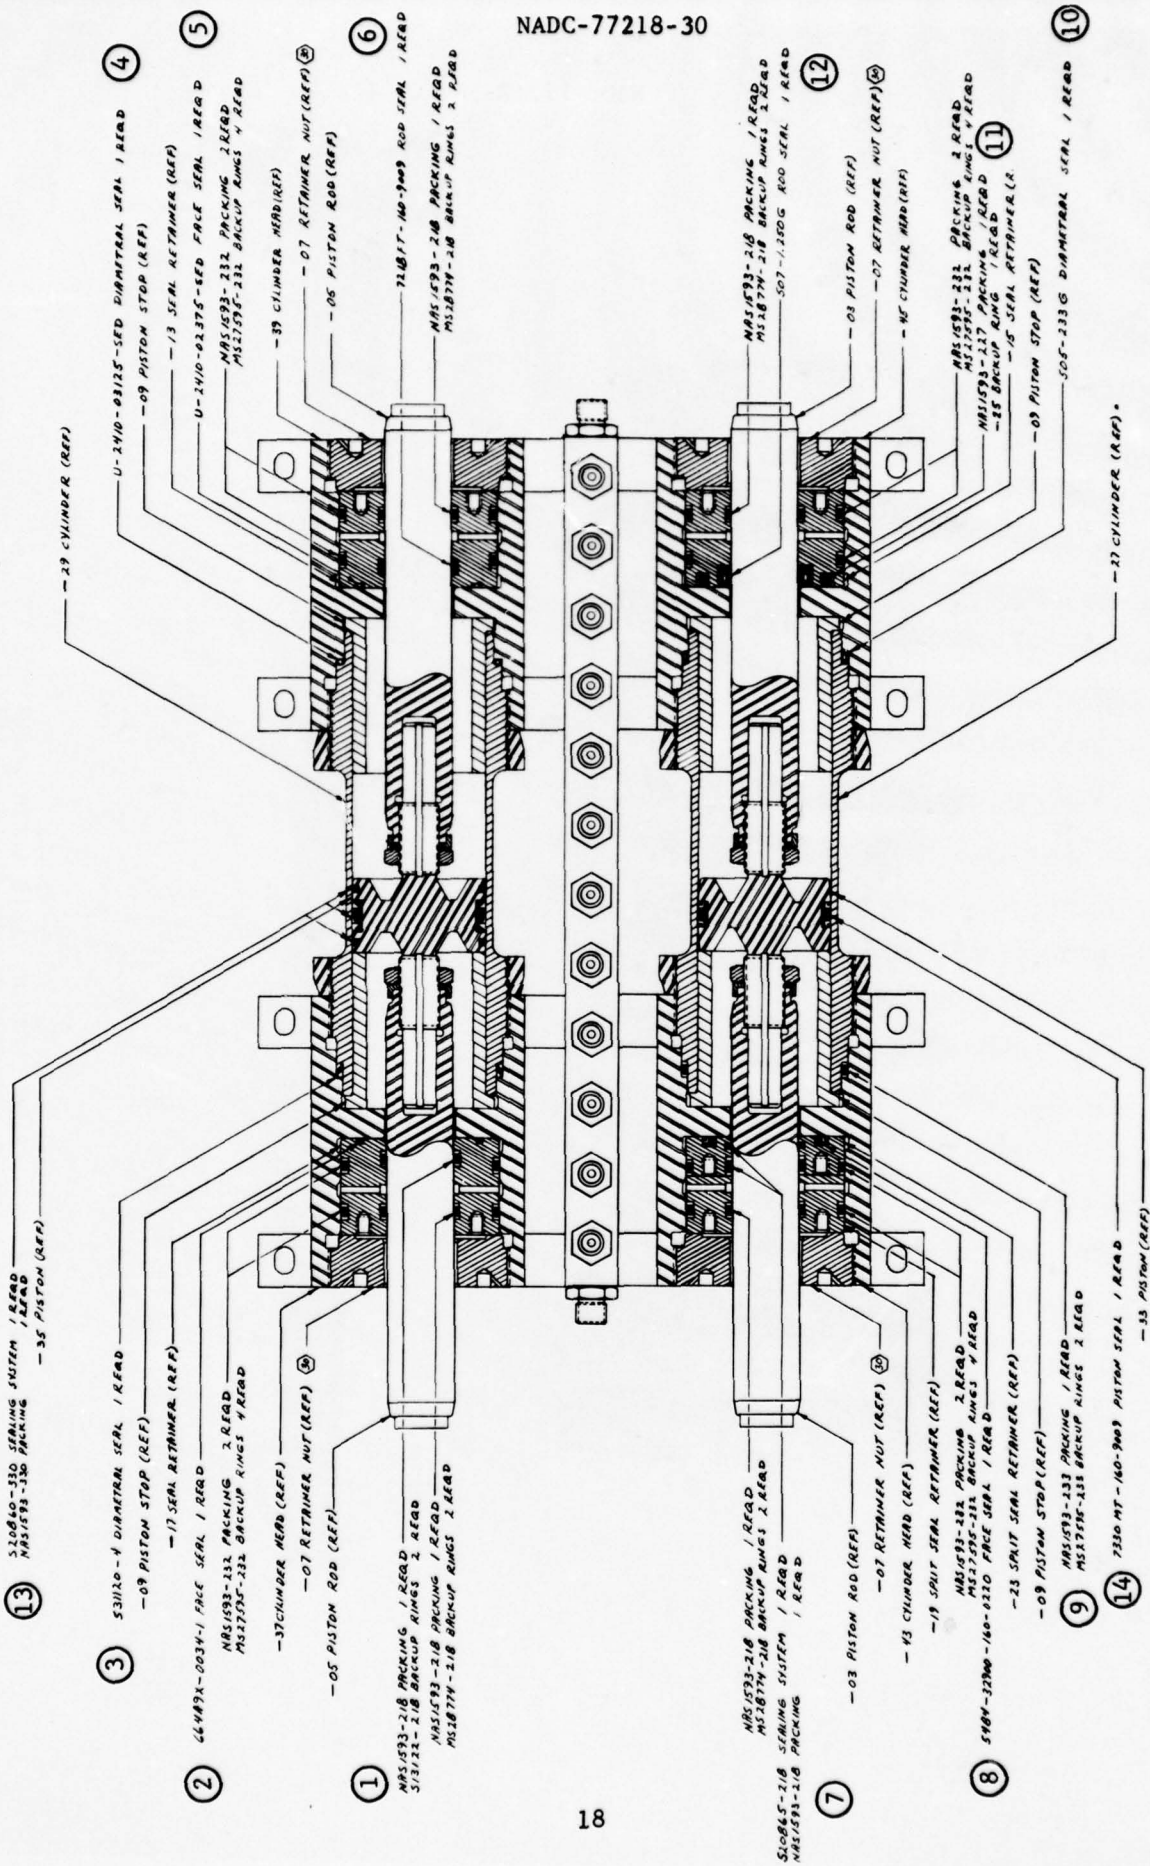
SEAL LOCATIONS IN TEST FIXTURE
